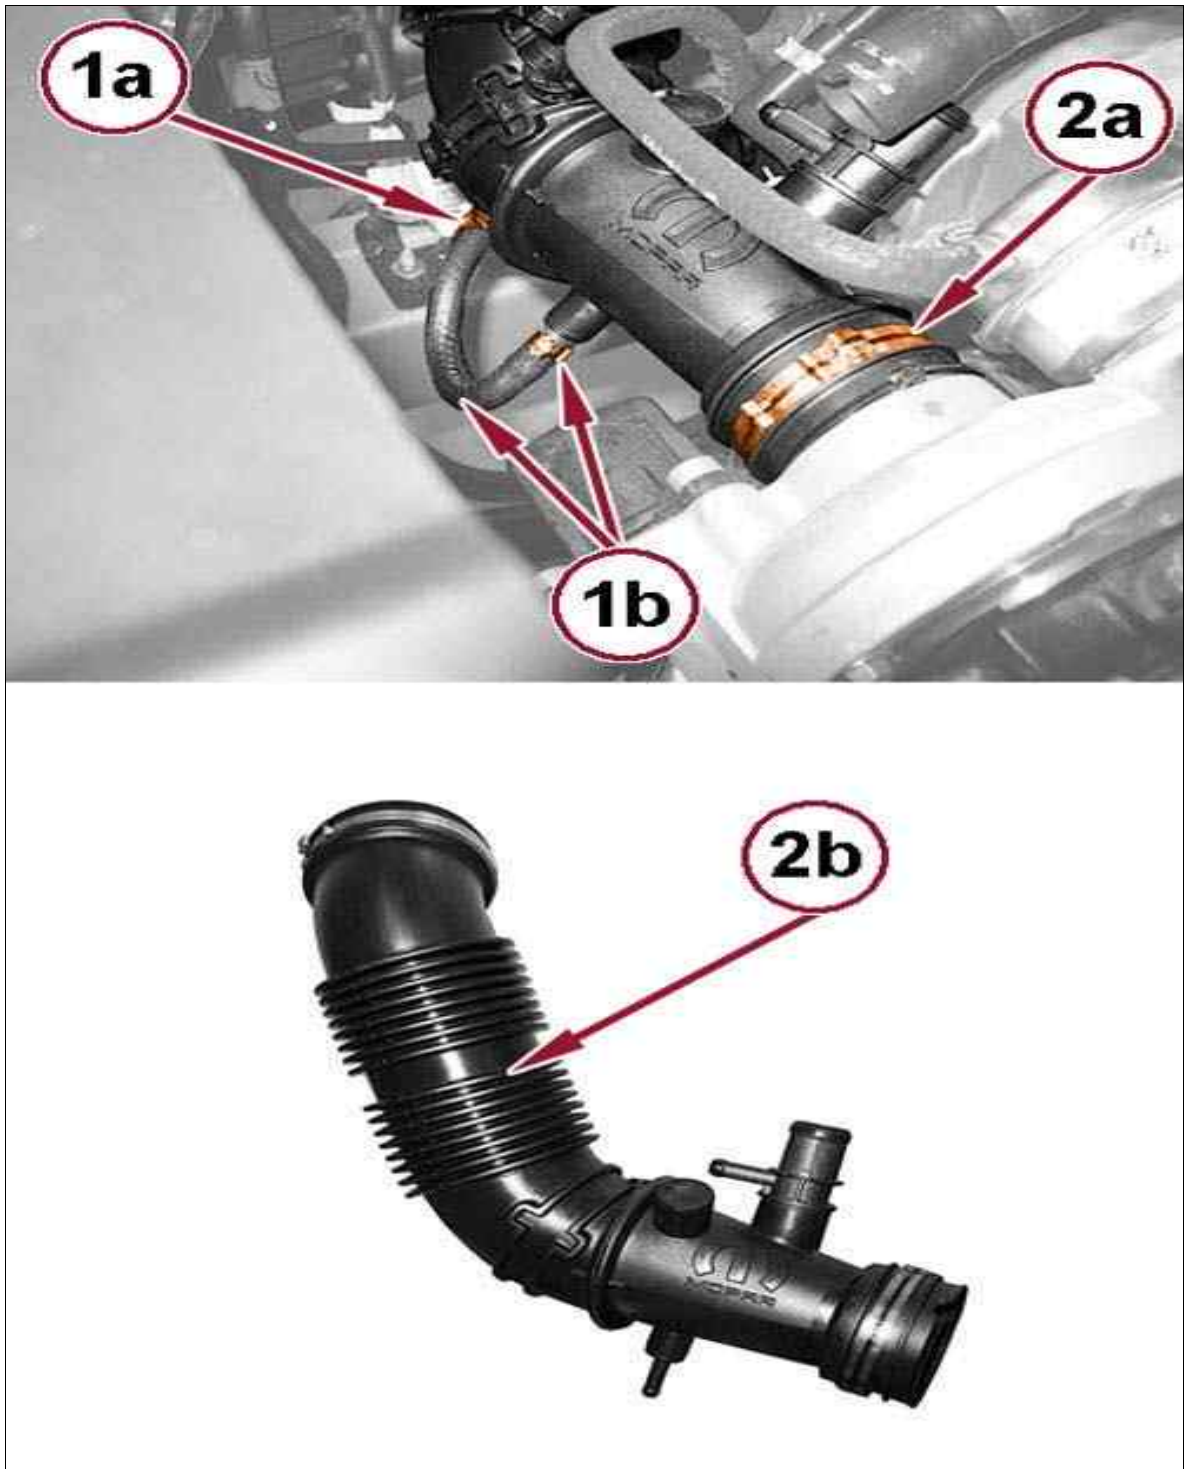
Waste-Gate Actuator Air Control Actuator Tube, Engine Oil Vapor Pipe Quick Coupling & Clip
